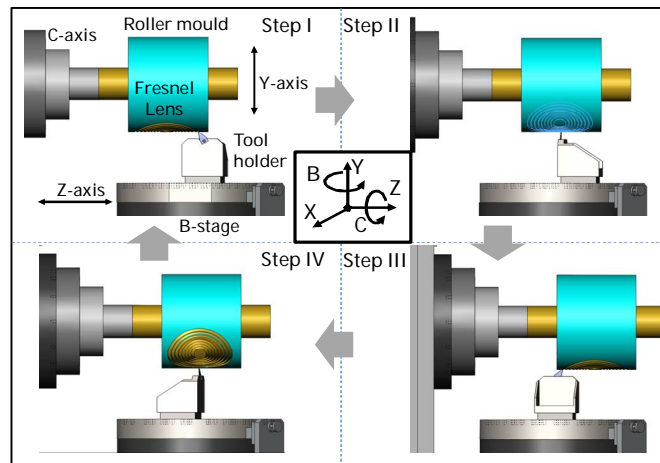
4-Axis Integrated Tool-Workpiece Motion[16]
